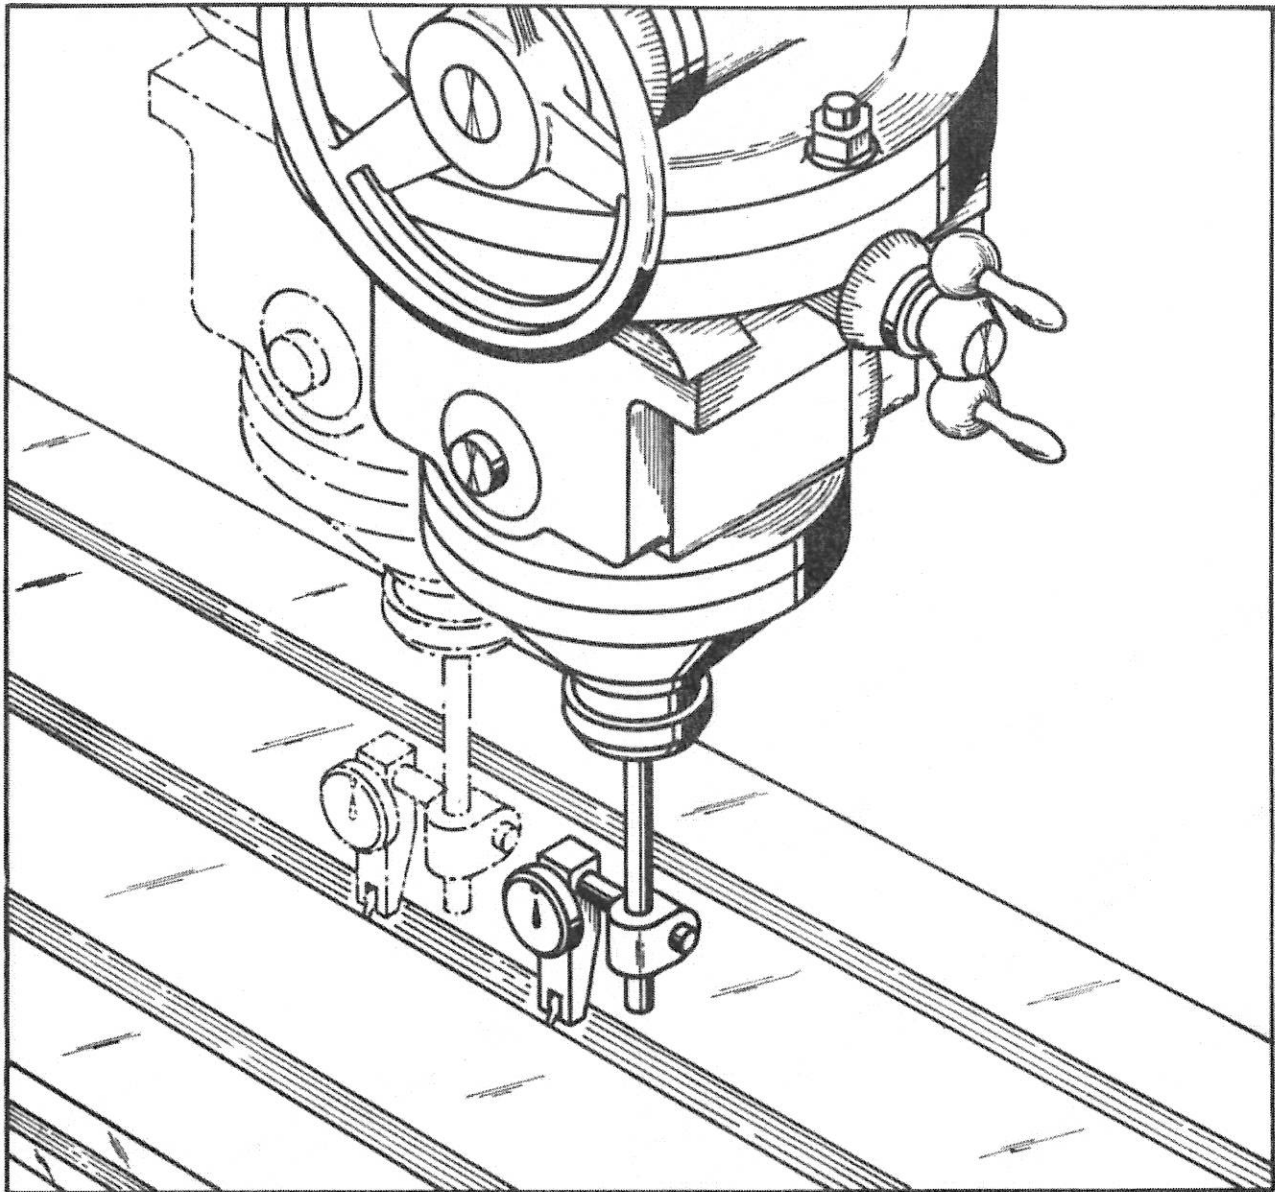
Setting Spindle Cross-Slide Parallel to Table Travel.
